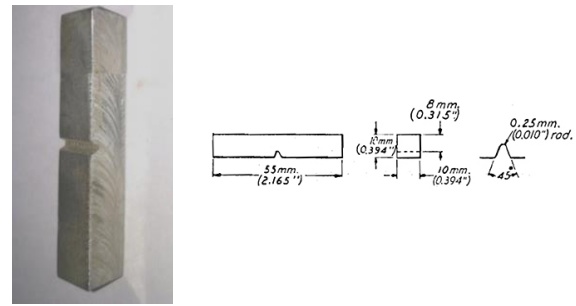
Charpy Impact Test Specimen (all dimensions in mm)
